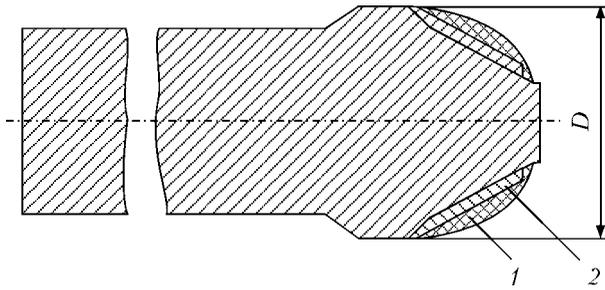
Schematic of edge preparation and surfacing of DN 50 rods: 1 – deposited metal before machining; 2 – same after machining
